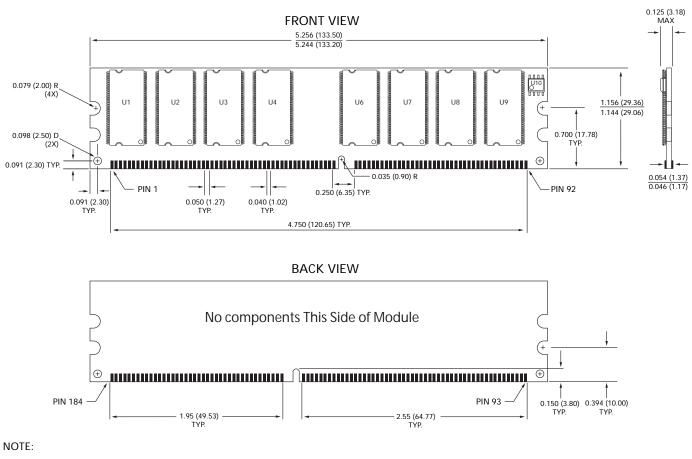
184-Pin DIMM Dimensions – Low-Profile PCB
